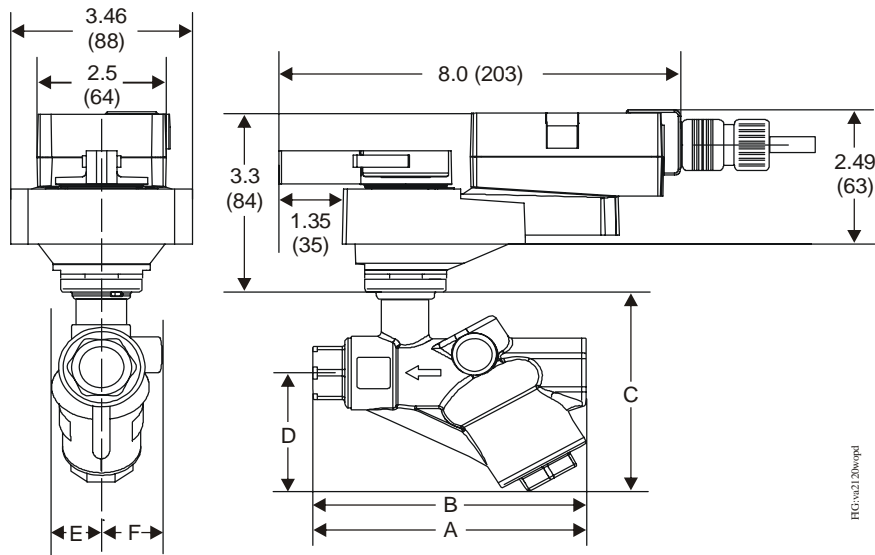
M2204 Actuated P1000 Valve without Pressure Taps Dimensions, in. (mm)
